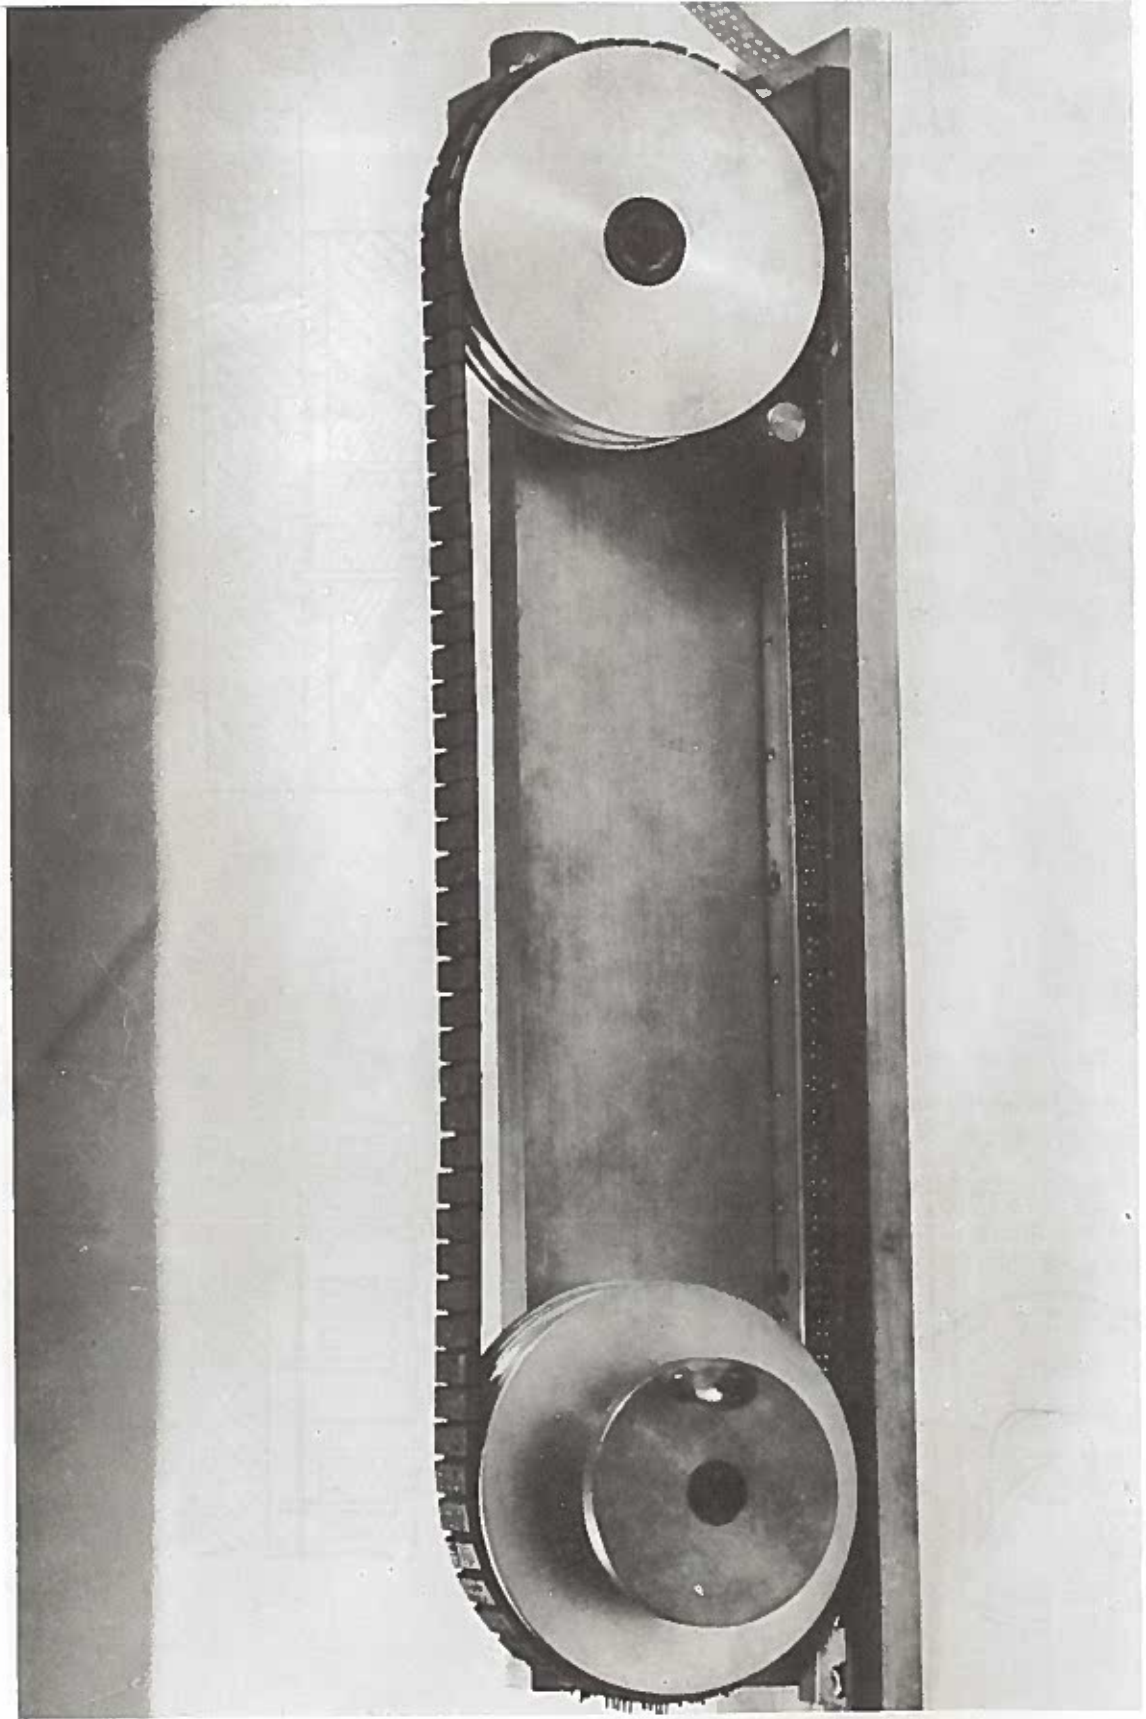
Continuous, Pin Element, Tape-to-Braille Transducer.
